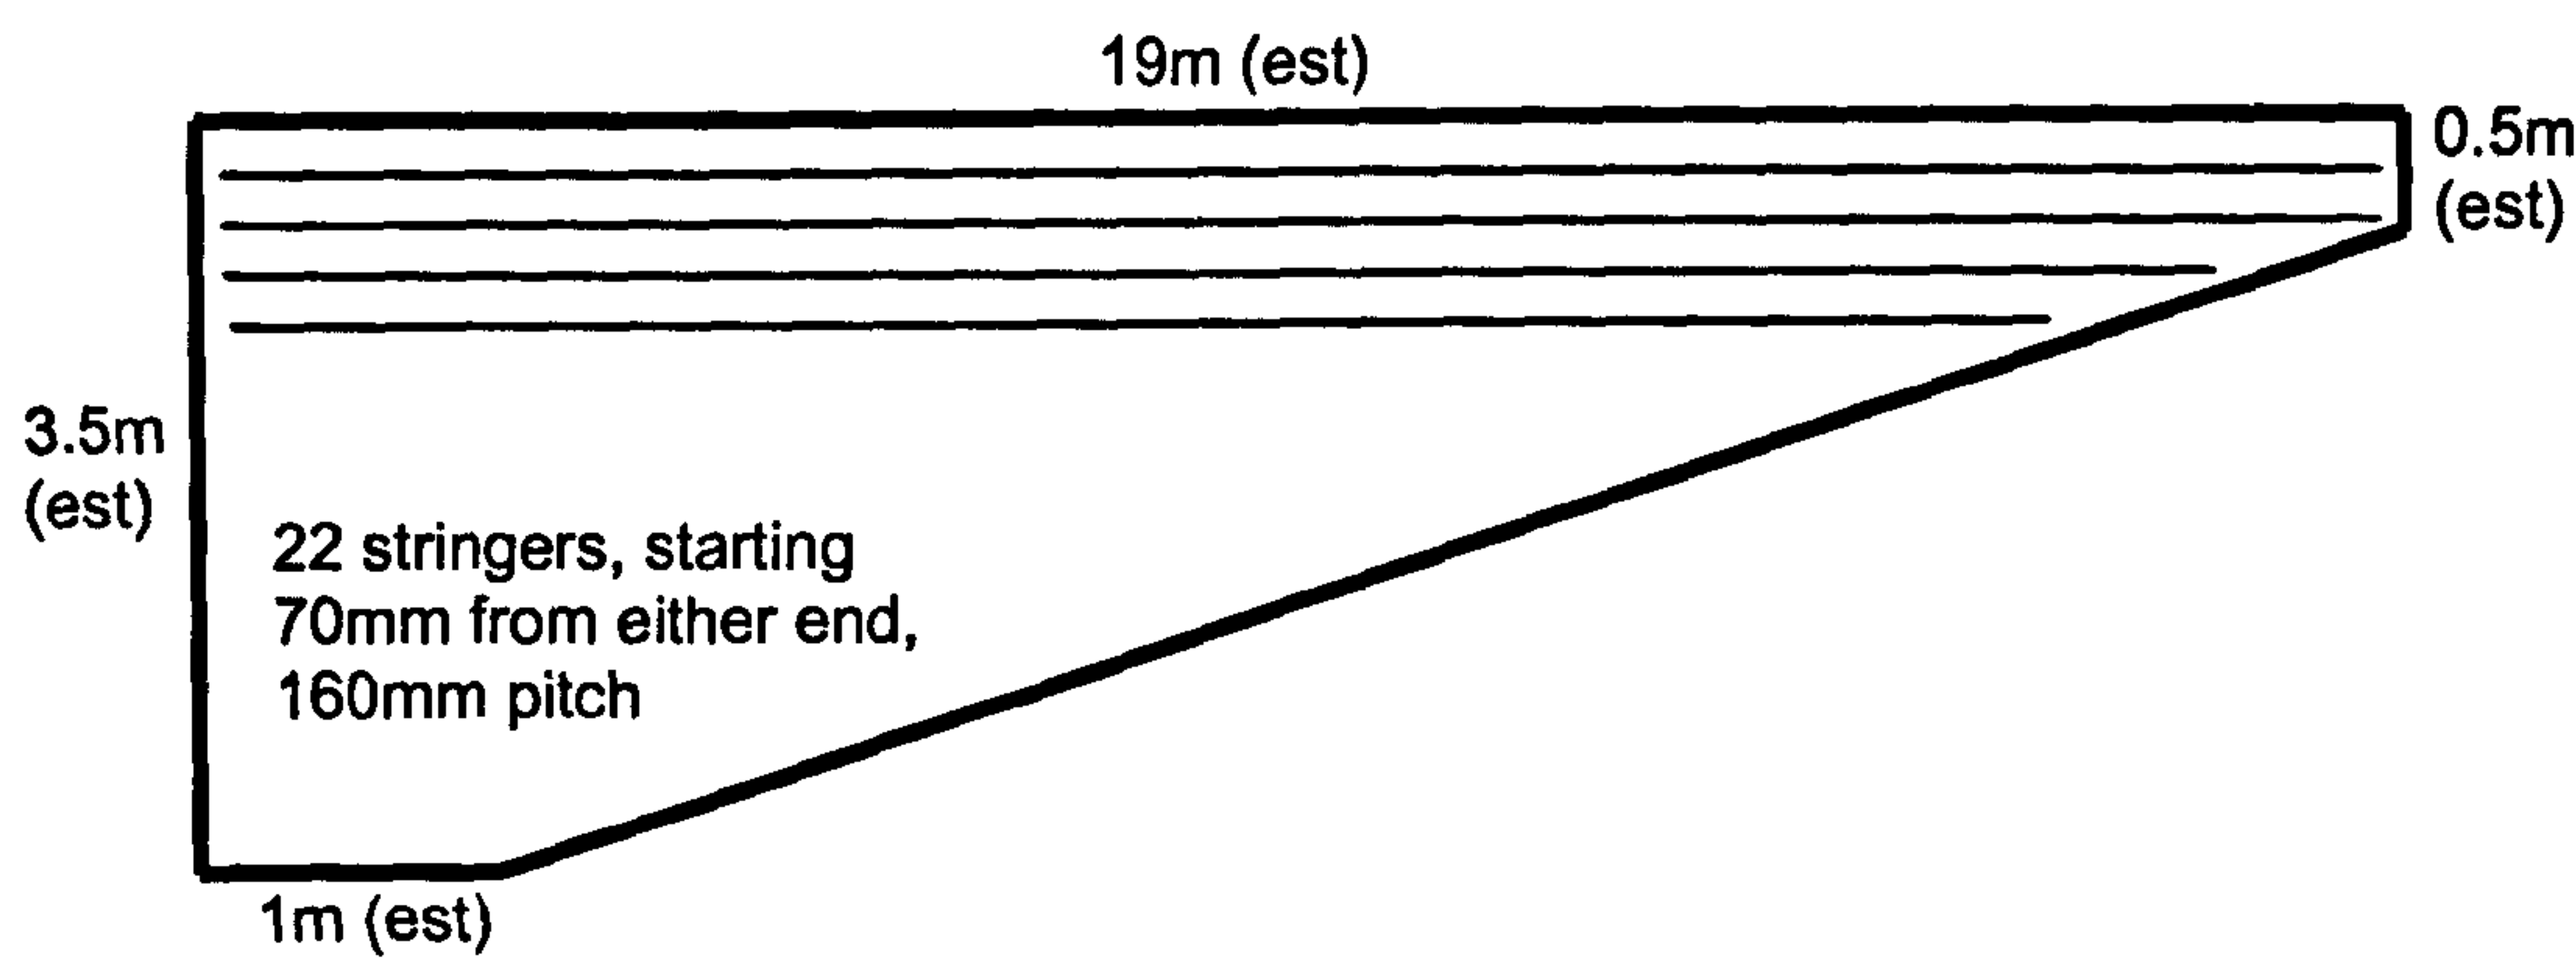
Schematic of a stringer-to-skin wing structure, with typical dimensions for an (unspecified) Airbus aircraft
